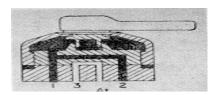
A-5-A and A-5-B Rotair Valve Assemblies
